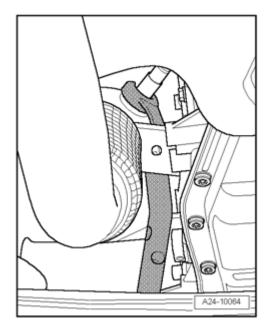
Removing Oxygen Sensor Using Tool 3337/5 And Extension 3337/6 From Ring Spanner 7-Piece Set 3337
